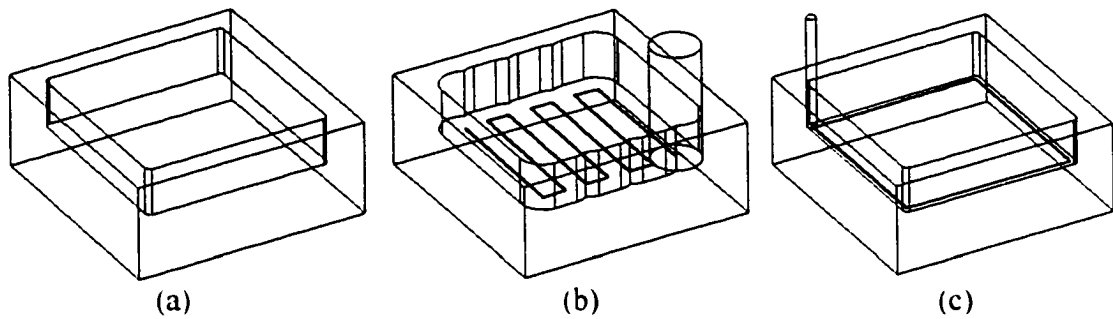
(a) A feature to be machined; (b) roughing cut; (c) finishing cut.
